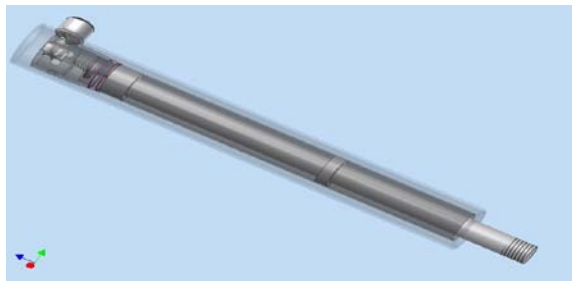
3D assembled view of the constructed regenerative shock absorber
